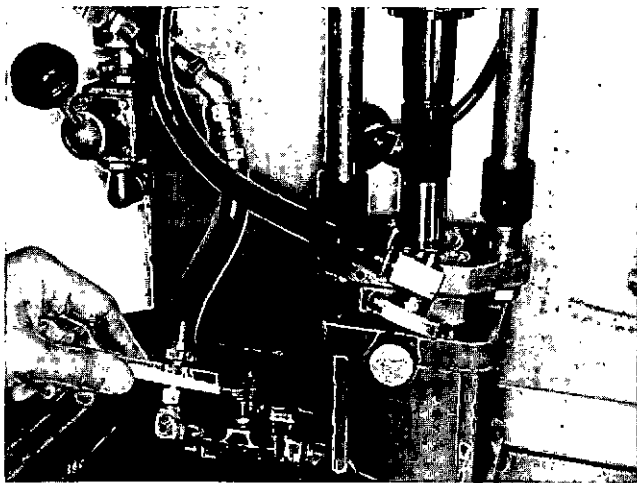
, (F60136). Close the hydraulic valve to clamp the injector
